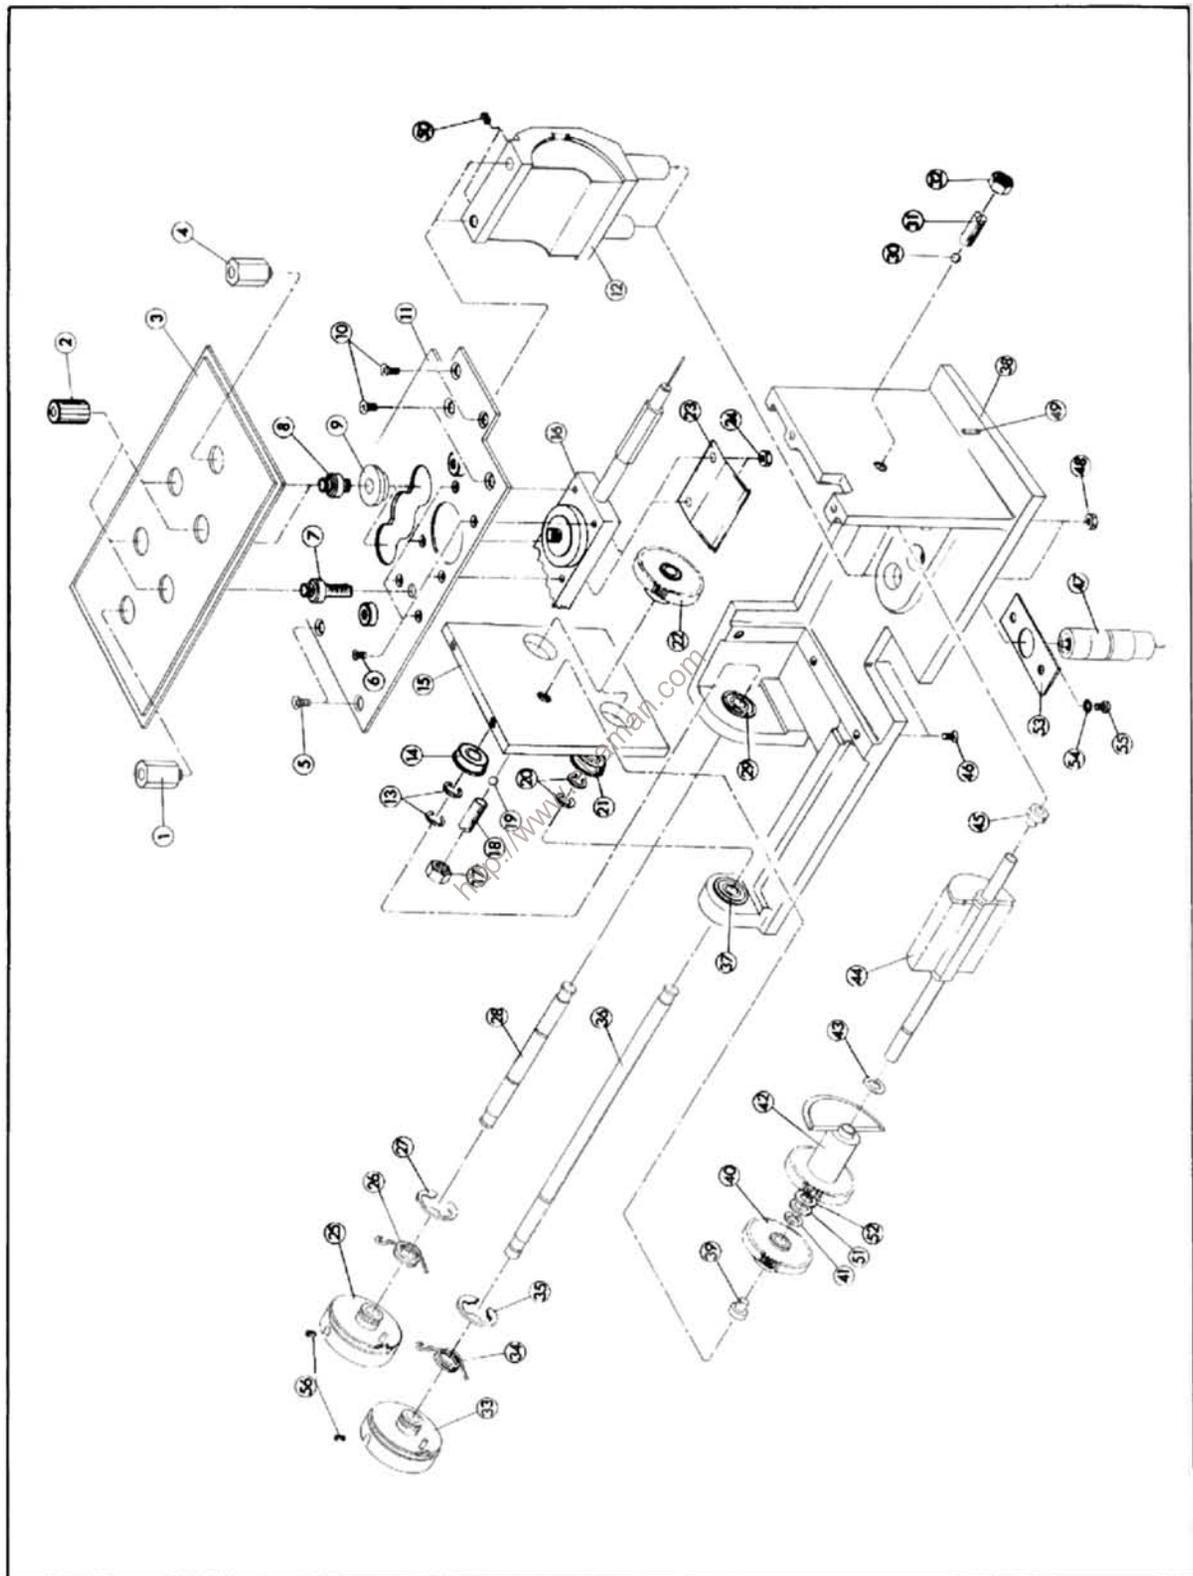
Exploded View of Tuning Capacitor Ass'y (sheet 1 of 2)
